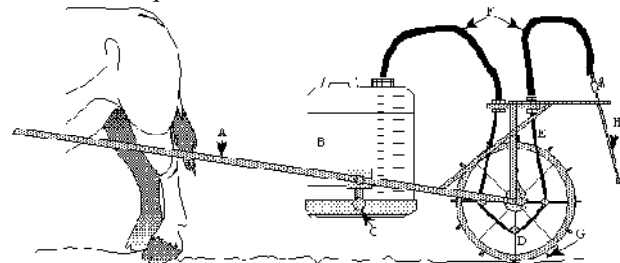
Prototype of the SGSC animal-powered herbicide applicator, showing the shafts (A), tank (B), cradle (C), rollers (D), peristaltic tubing (E), lightweight transmission hose (F), auto-skid wheel lugs (G) and a single nozzle assembly (H) (Fowler 2000).
